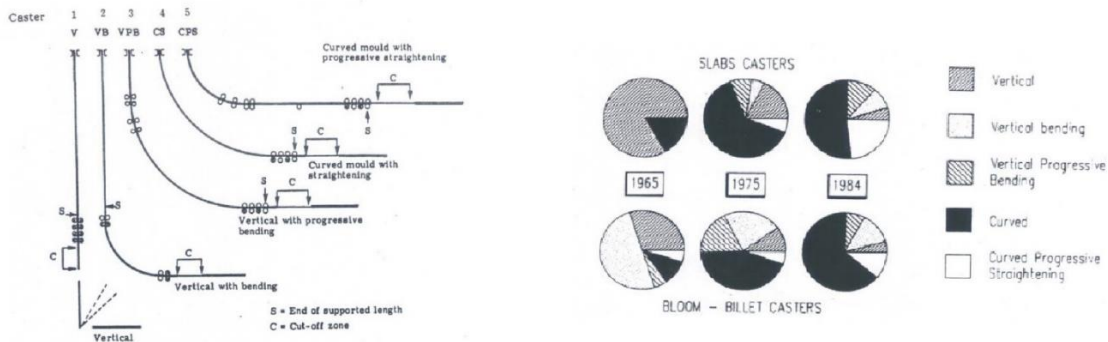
(a) Types of Continuous casting machine designs. (b) Global demand for different continuous casting machine designs for slab, bloom and billets casters [11].
